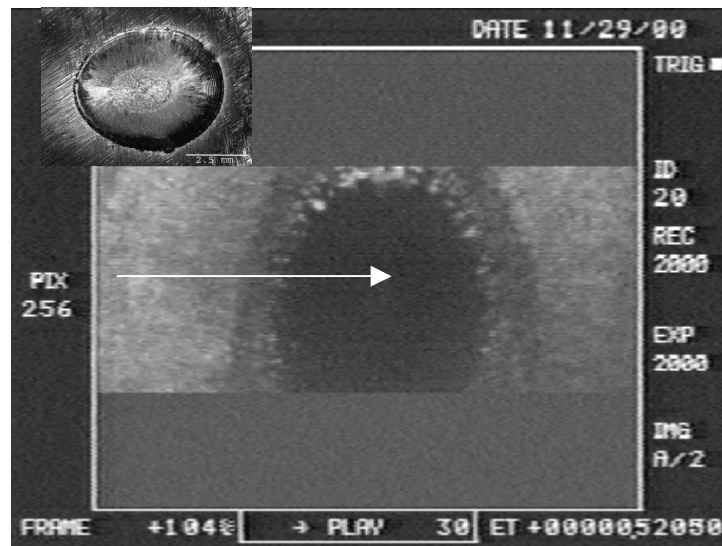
Solidifying 75 Amp GTA spot-weld in stainless steel. The inset shows the solidified weld. The arrow marks the location where the data in Figure 7 was extracted.
